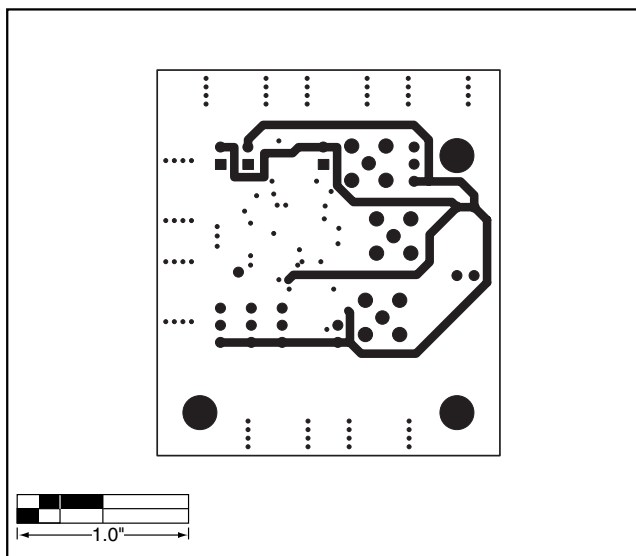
MAX2385/MAX2386 EV Kit PC Board Layout
